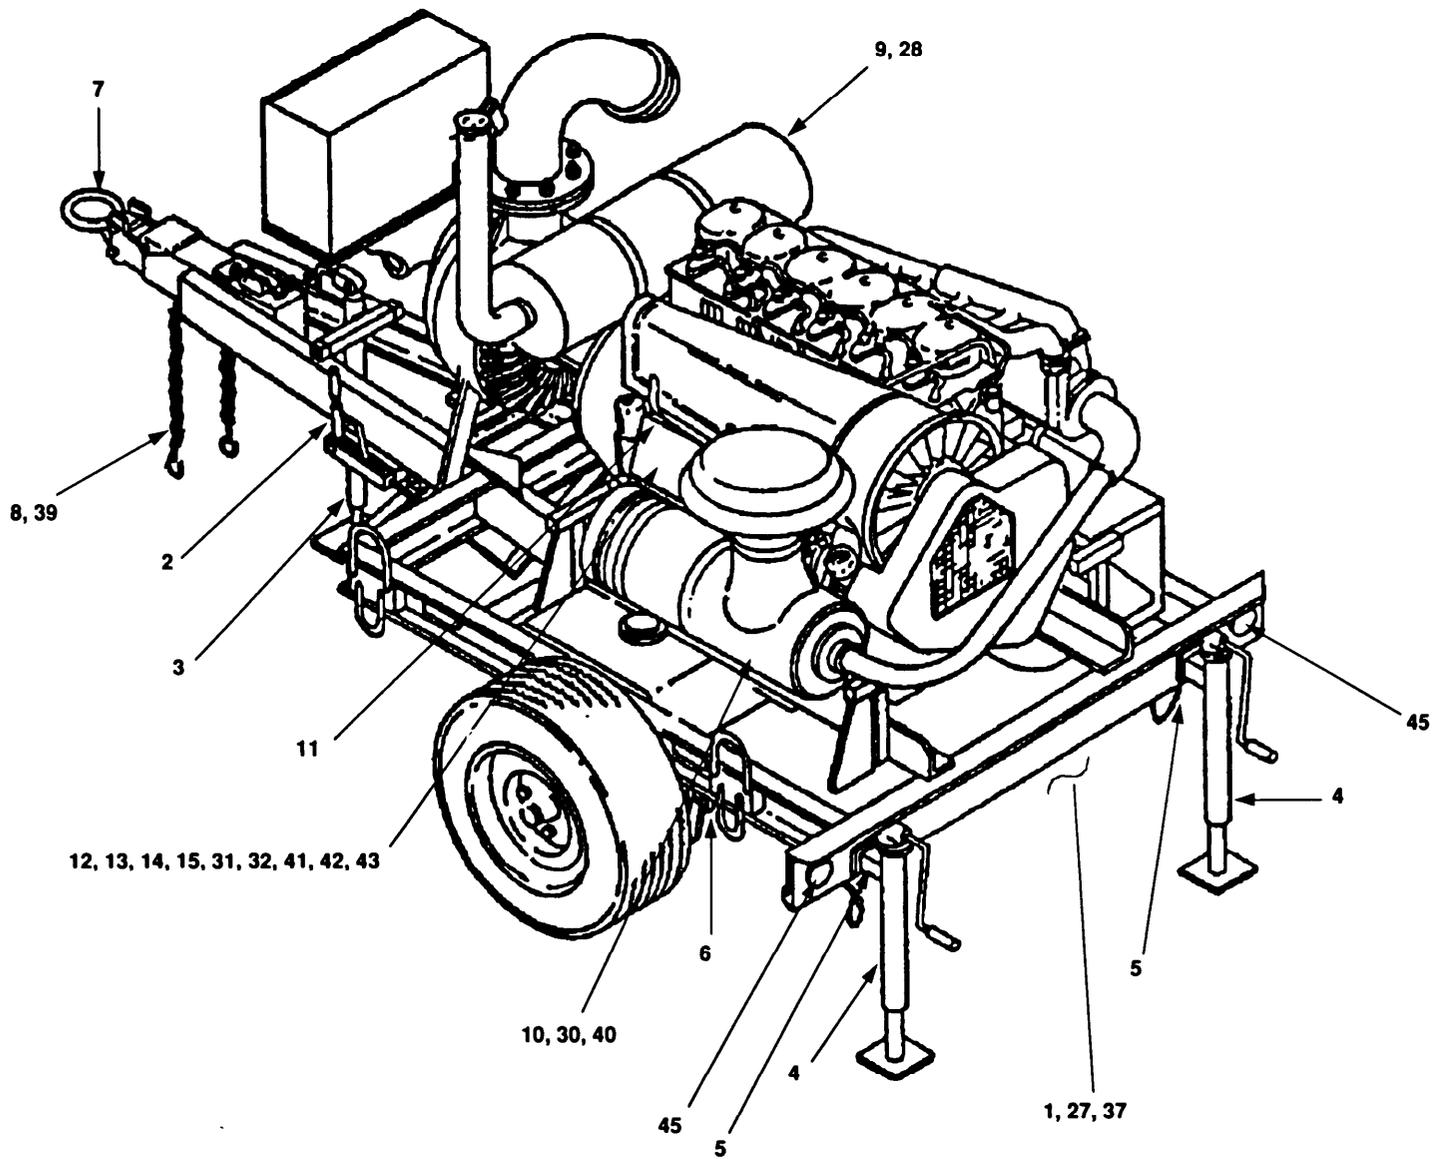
Pumping Assembly Model US636HCCD-1 PMCS Routing Diagram (Sheet 1 of 2).
